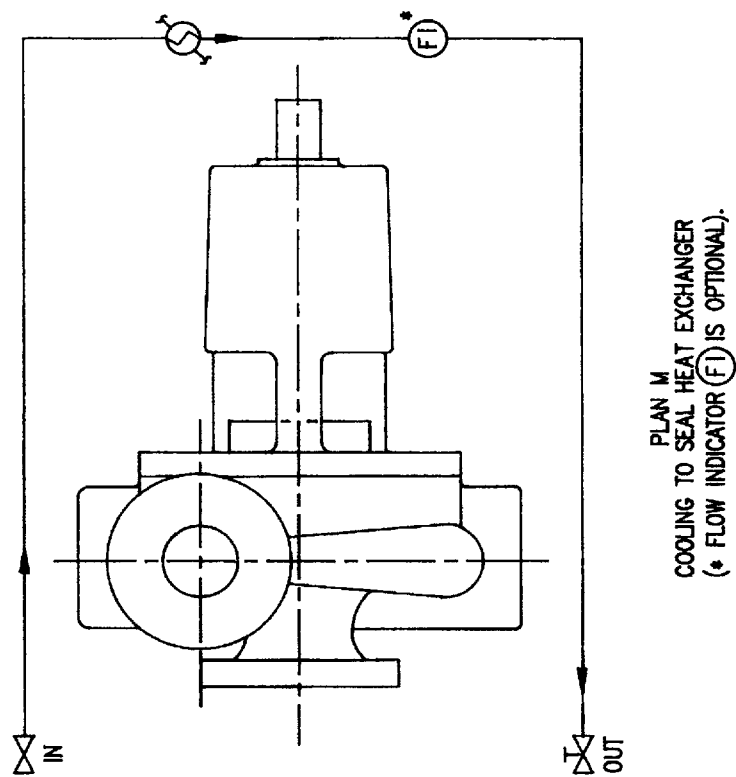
B—Cooling Water Piping for Overhung Pumps—Plan M
